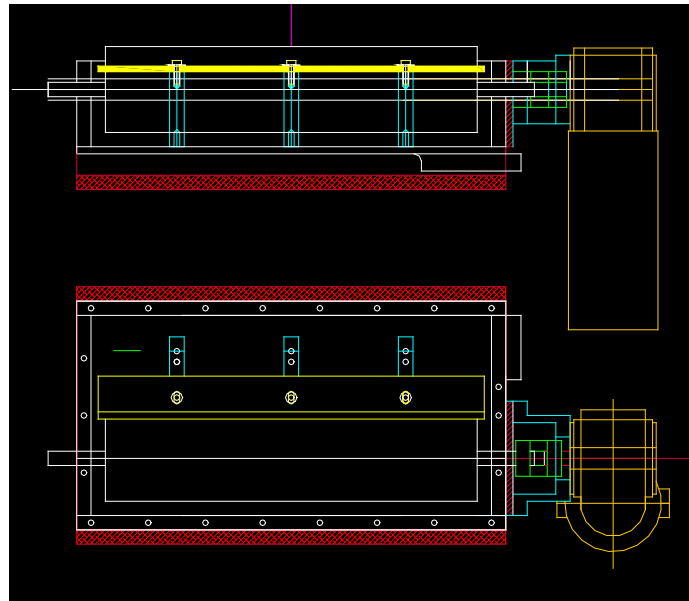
Design drawing of the Core Glue Unit (Glue Unit 1)
